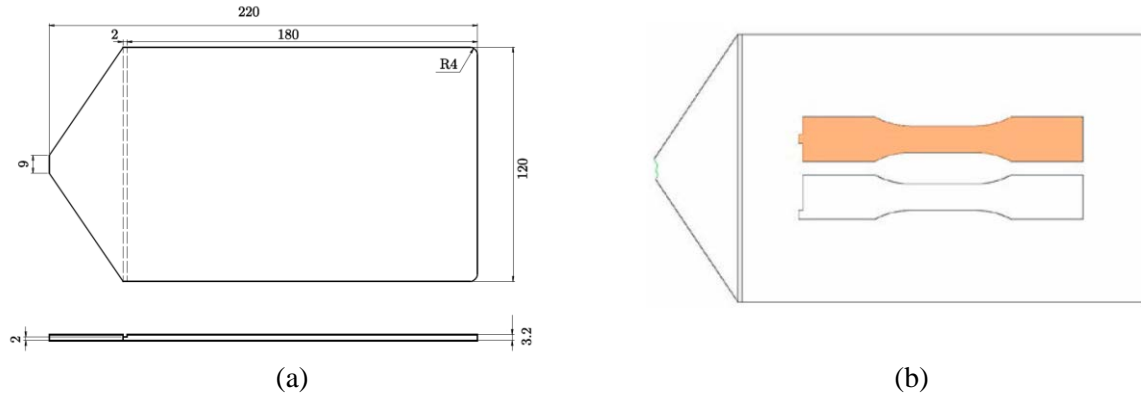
shape and dimension of the injection moulded plate (a); position of the specimen (b)
